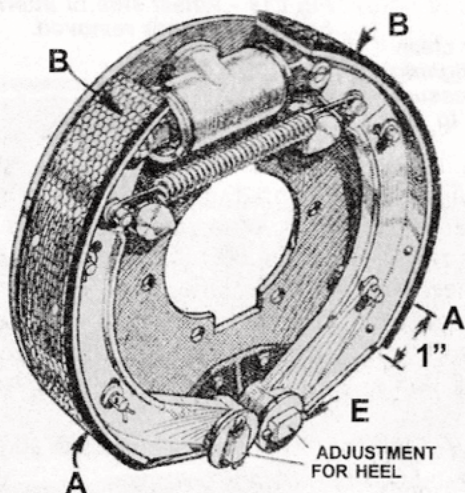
Wheel side solid shoe type brake showing eccentric anchors at E.
